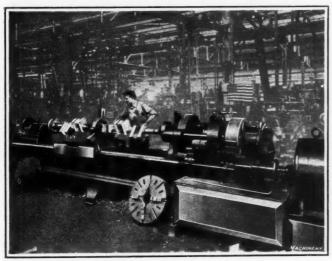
Turning Six-throw Crankshafts for 120-horsepower Engine
